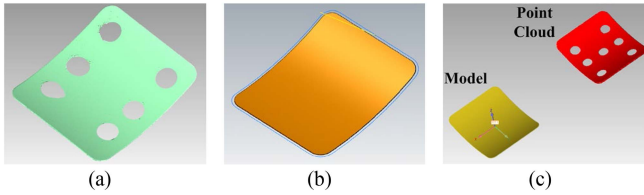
(a) Point cloud data of the workpiece collected by the sensor robot. (b) Machining trajectory of skin samples generated by the corresponding theoretical contour. (c) Point cloud matching is used to locate the workpiece to be machined.
